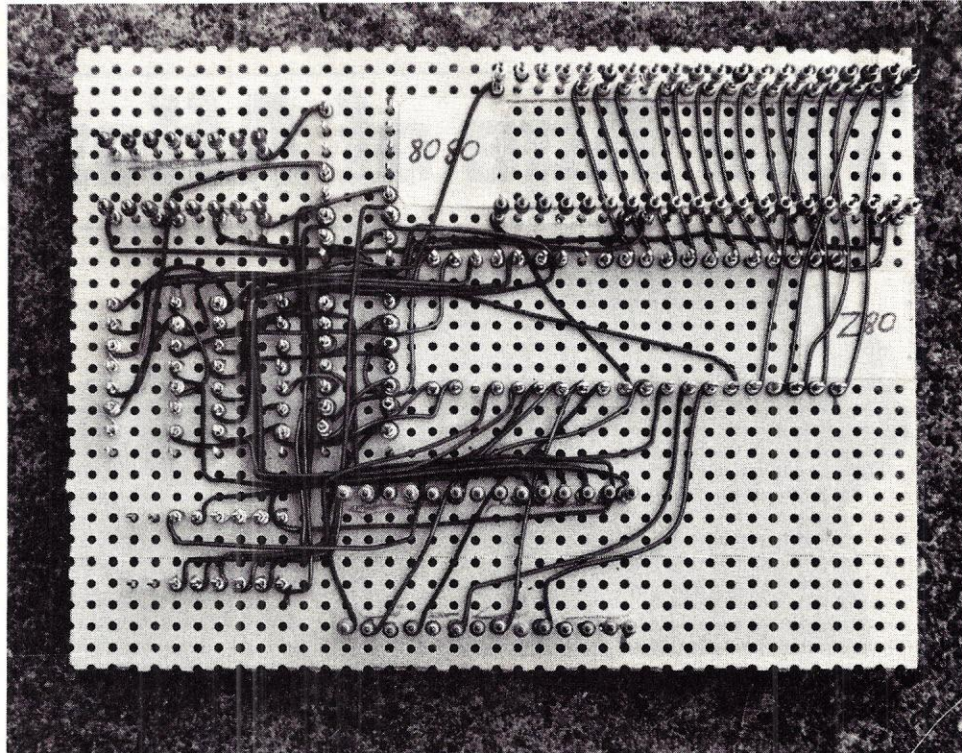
Bottom view of the adapter showing wire-wrap technique.
